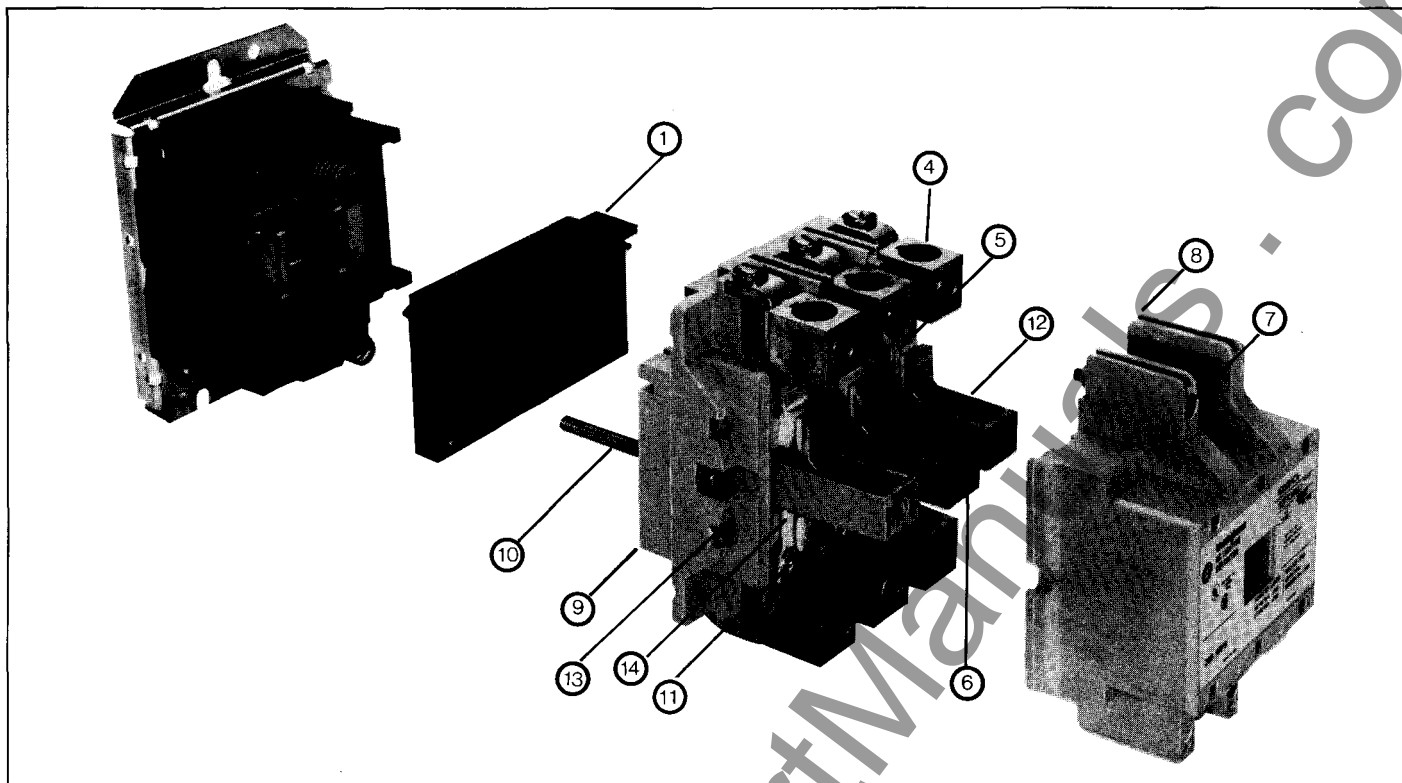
200 Ampere, A202 Contactor (Exploded View)
